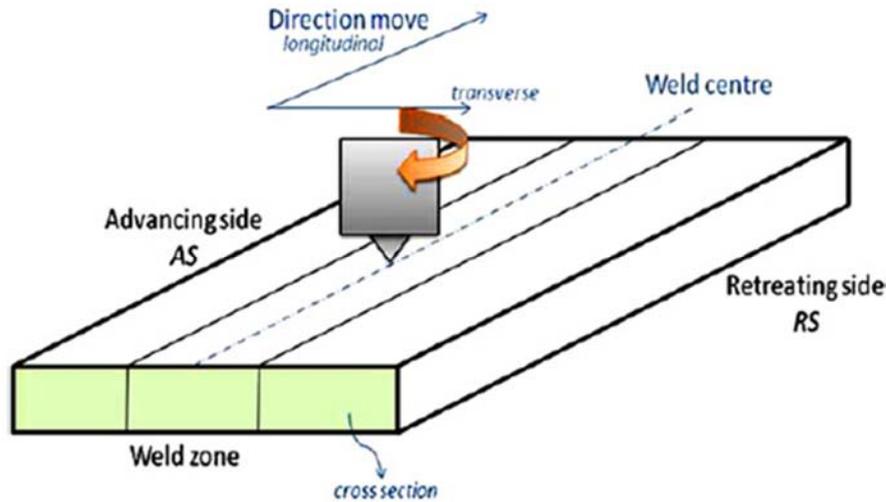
Geometry of FSW process, also indicating the tool transverse direction [6].
